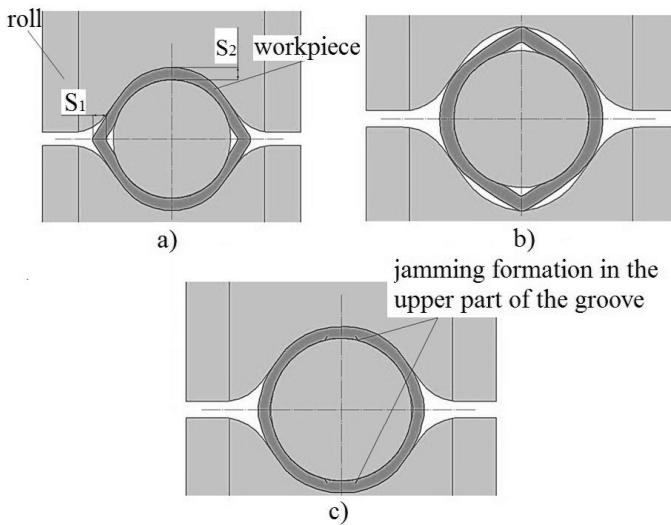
Scheme of the “guide mark” defect formation on the internal surface of the pipe, a) stripe formation in the groove tapers when rolling on plug rolling mill 1, b) pipe having been turned is clamped by the upper part of the groove of plug rolling mill 2, c) jamming at groove filling
